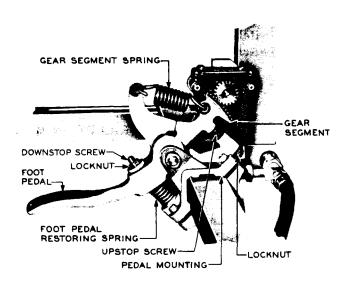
Foot-Pedal Assembly (cover and drip pan removed)
